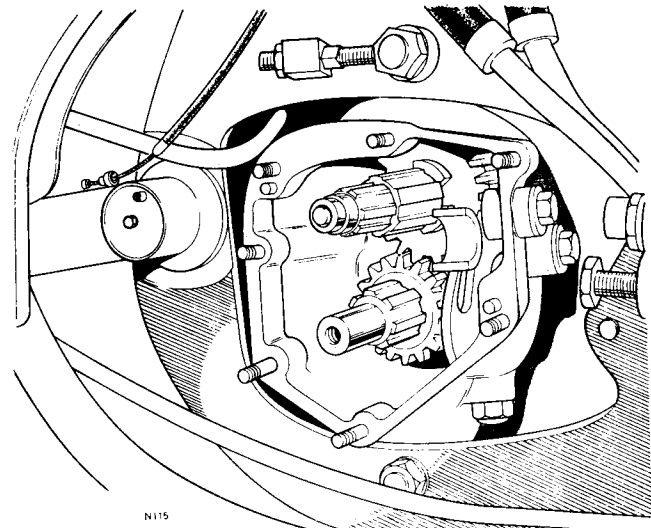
Mainshaft and layshaft fitted to gearbox shell
